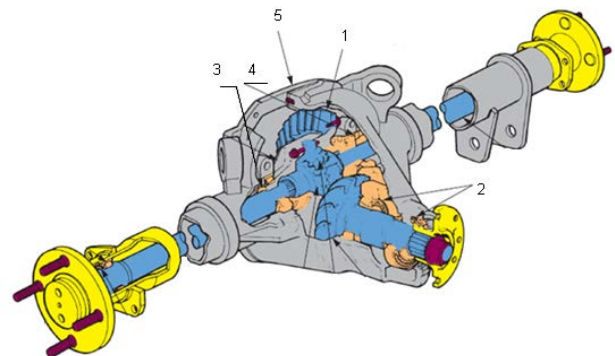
Measurement points in the rear axle assembly: 1 - Differential carrier, 2 – Bearing of the pinion gear, 3 –Right side bearing differential case, 4 - Left side bearing differential case, 5 - Back part of the rear drive axle
